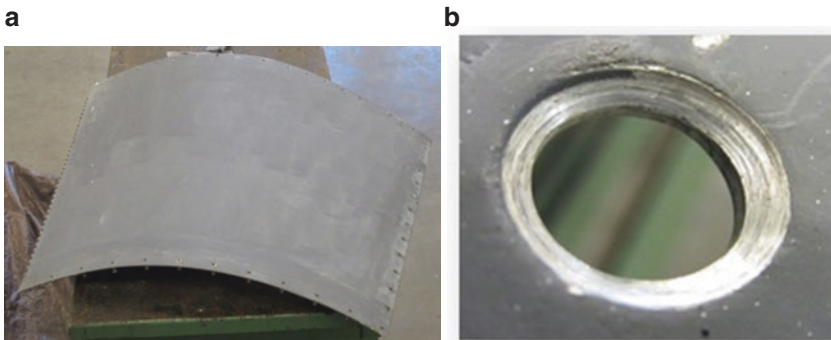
A single FEB panel and close-up of wear around fastener holes
